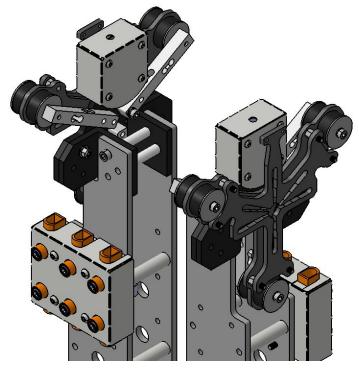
Coaxial back-to-back without the special mount. Above 170mm range, or 250mm with the railing system.
